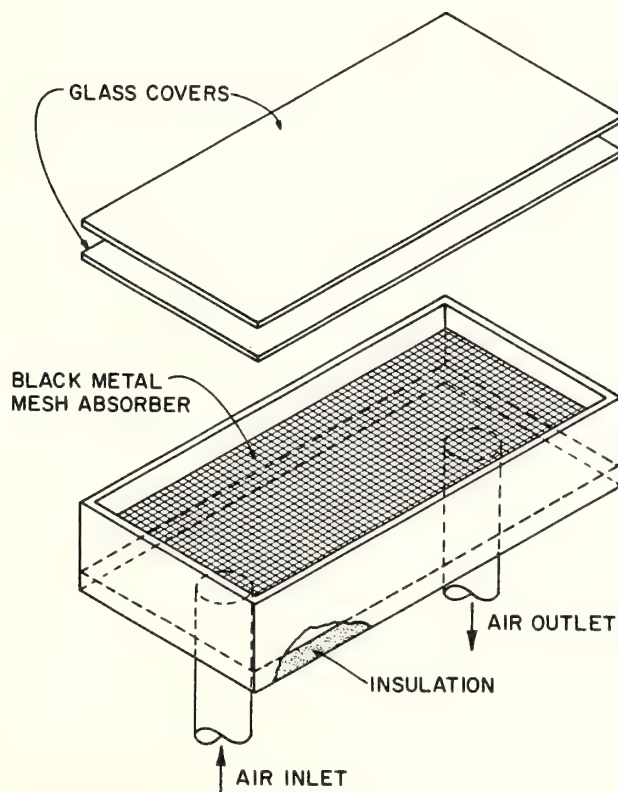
Air Collector with Perforated Absorber Plate (Exploded View)
